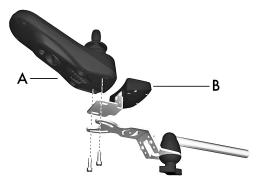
The control panel is held in place by two screws on the rotational panel holder.
